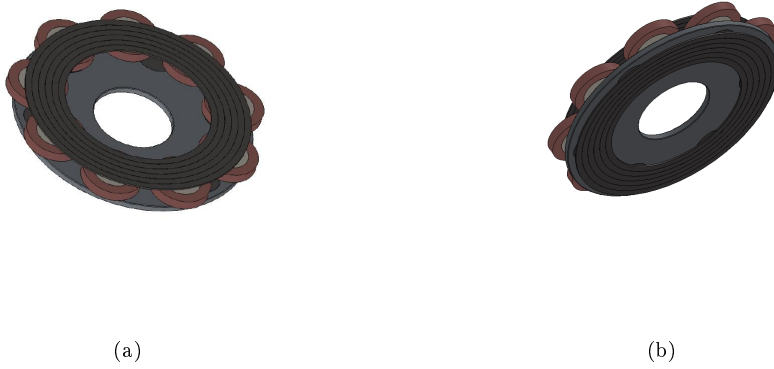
Brushless motor magnetic circuit inner side (a) and outer side (b) shown without other reaction wheel components.
